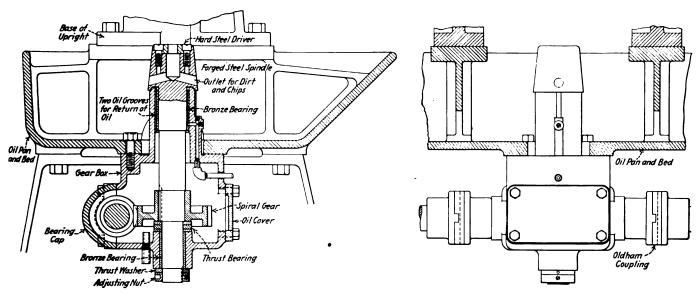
The Construction of the Bed or Chip Pan on the Foster Bolt Machine
